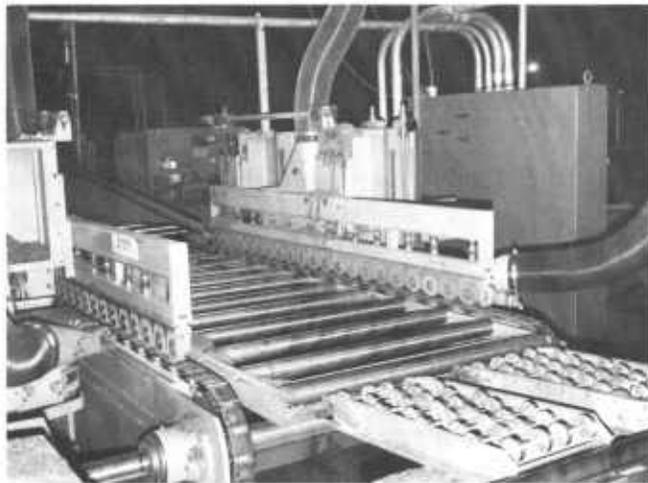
Outfeed end of edge trimmer. Note feed chains and hold-down rolls.
